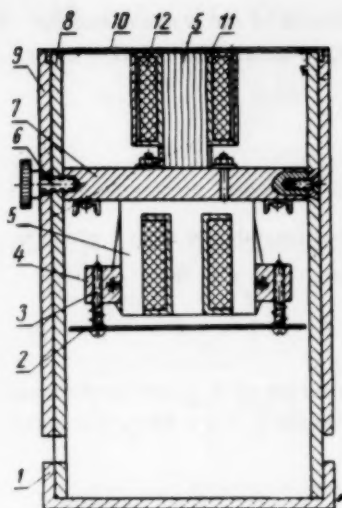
Construction of the transducer: 1) Bottom cover; 2) adjusting plate; 3) micro-meter screw; 4) spring holder; 5) permalloy core; 6) holding screw; 7) coil mounting panel; 8) internal container; 9) external container; 10) top cover; 11) core; 12) winding.
